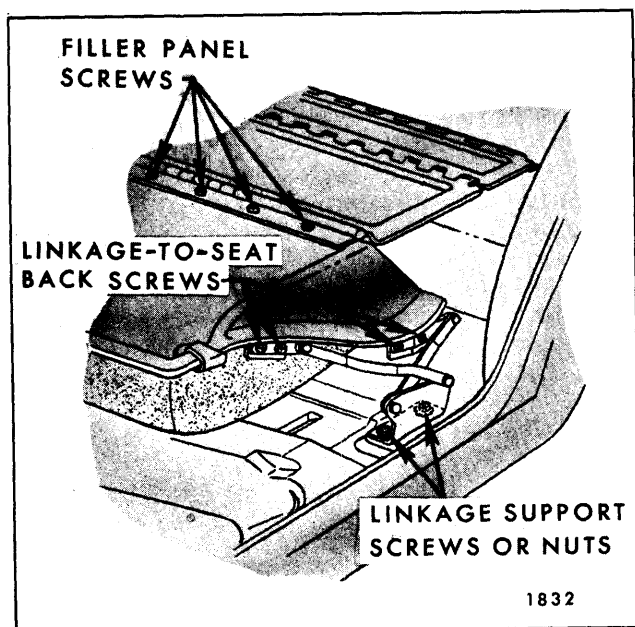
Folding Second Seat Back Linkage and Filler Panel
